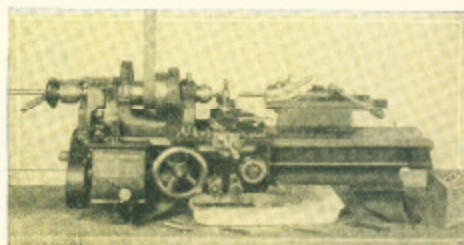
Lathe with Hand Lever Type Draw-in Chuck and Semi-Automatic Bed Turret.
